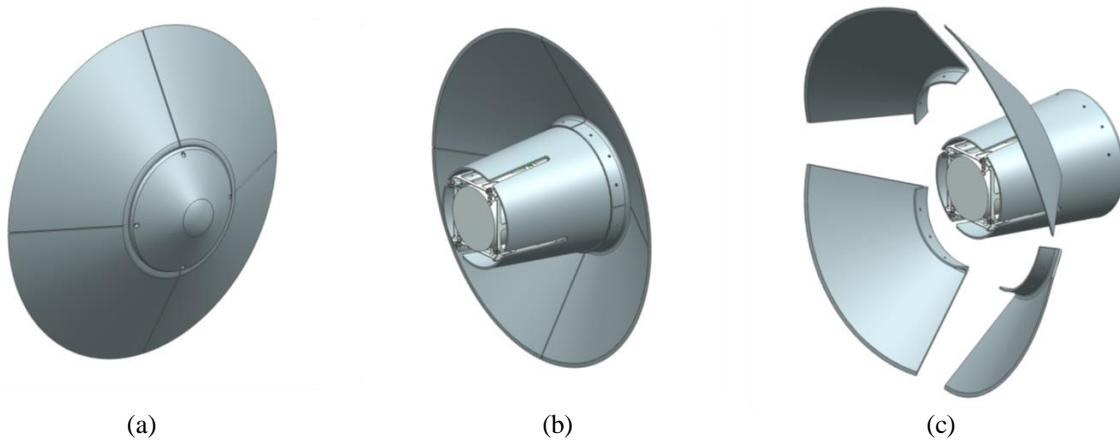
Drag skirt CAD views: (a) front isometric, (b) rear isometric, and (c) post-jettison rear isometric.
